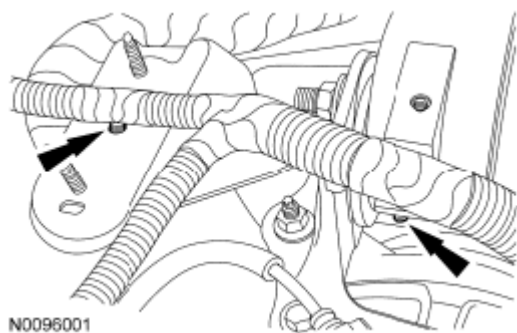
Locating Negative Battery Cable Pin-Type Retainers
